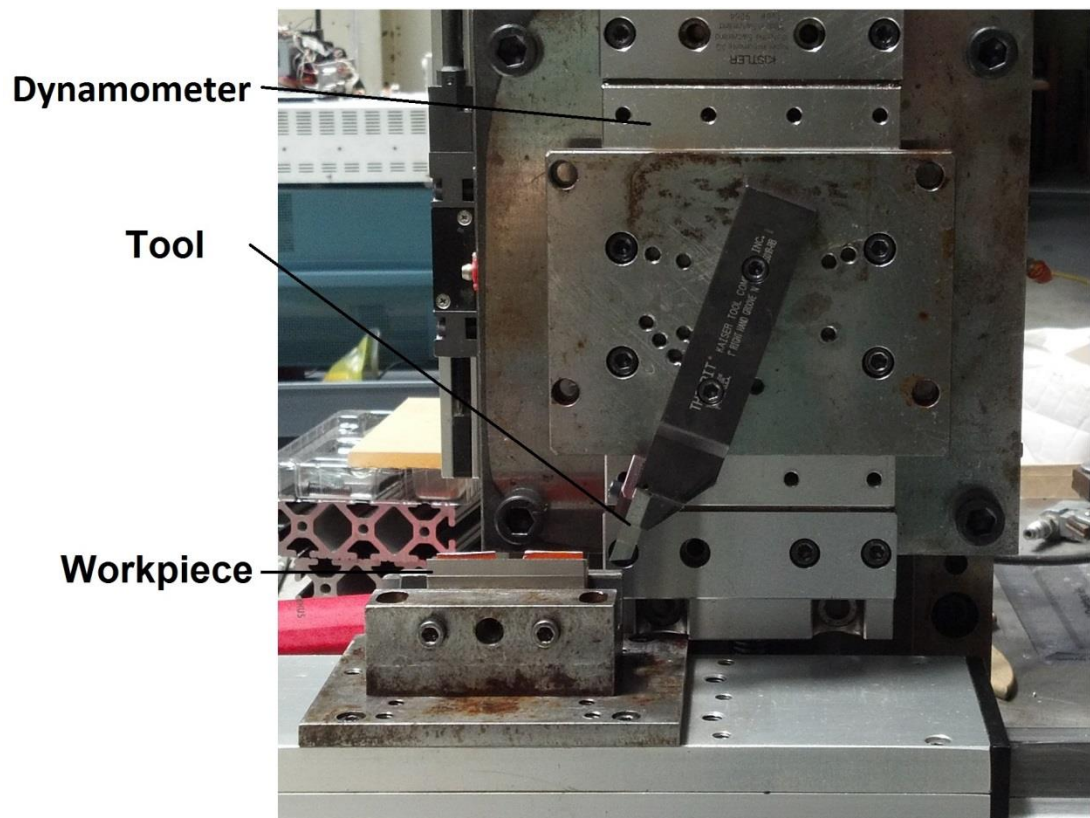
Close up of experimental setup. The tool is mounted on the dynamometer. The workpiece is mounted on the linear slide and passes under the tool to achieve material removal
